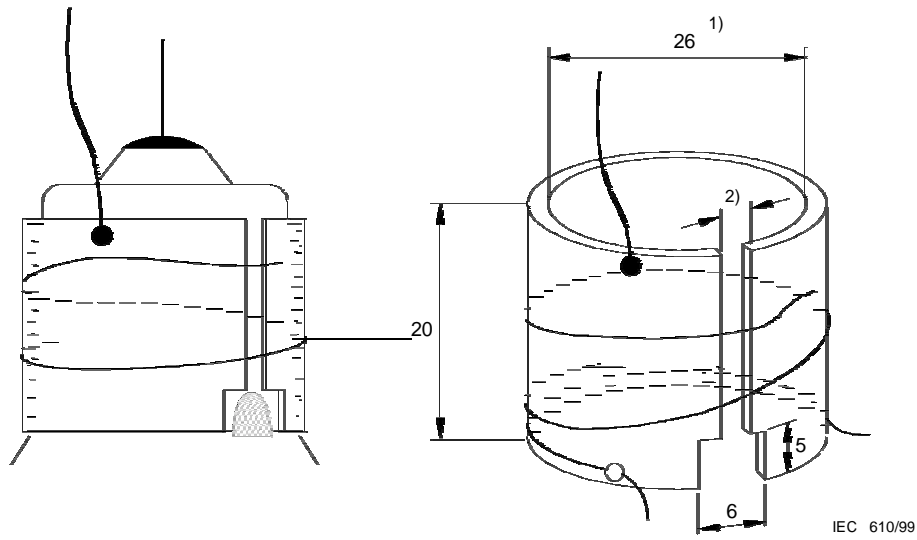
Approximate dimensions of test lampholder for E14/20 cap
